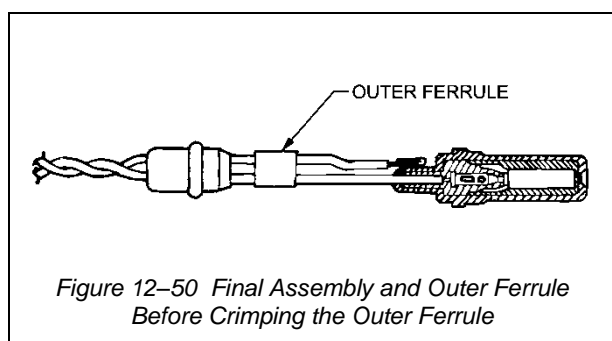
Final Assembly and Outer Ferrule Before Crimping the Outer Ferrule
